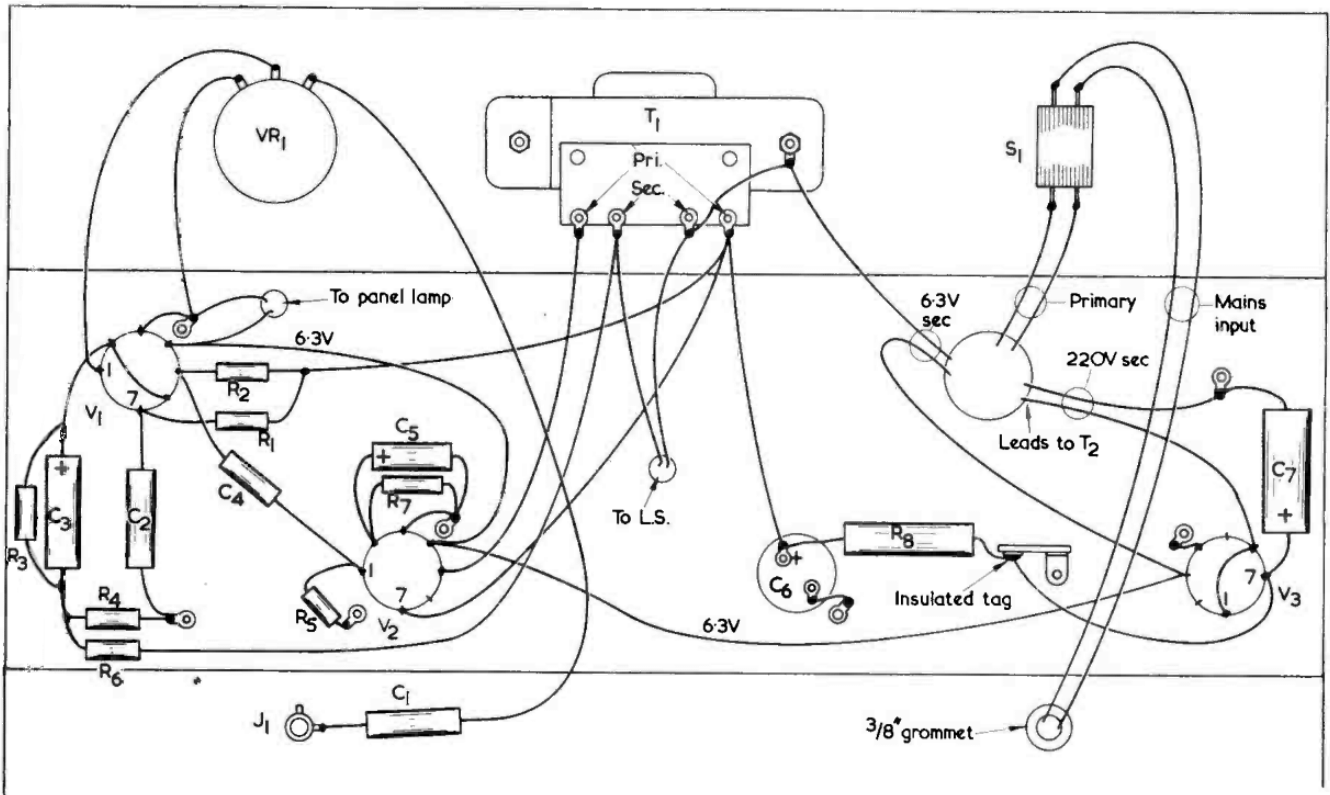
Details of the wiring. The tag layout shown for speaker transformer  $T_1$  applies to the component employed in the prototype; other transformers may have a different tag layout and the connections shown here should be modified accordingly
